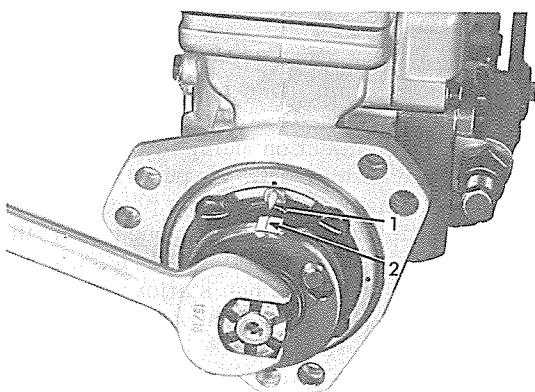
Timing Mark on Pump Drive Gear Hub Aligned With Timing Pointer (T-27635)
